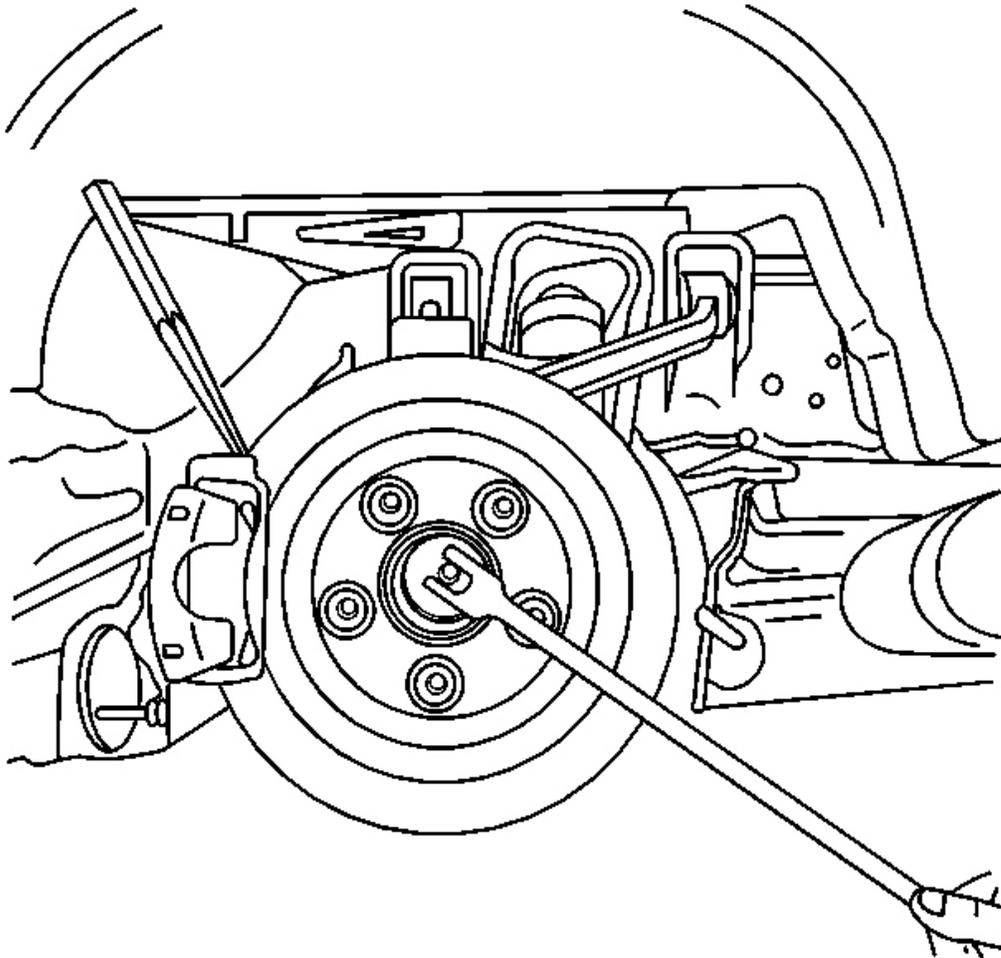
Inserting Drift Or Punch To Brake Rotor Cooling Fins & Brake Caliper
